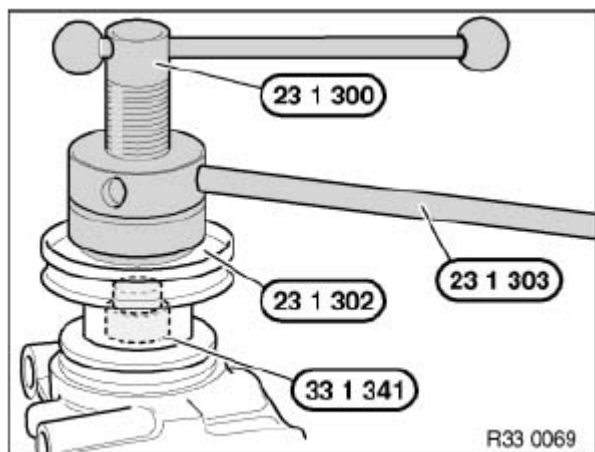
Identifying Special Tools (23 1 300, 33 1 341 And 23 1 303) On Drive Flange
